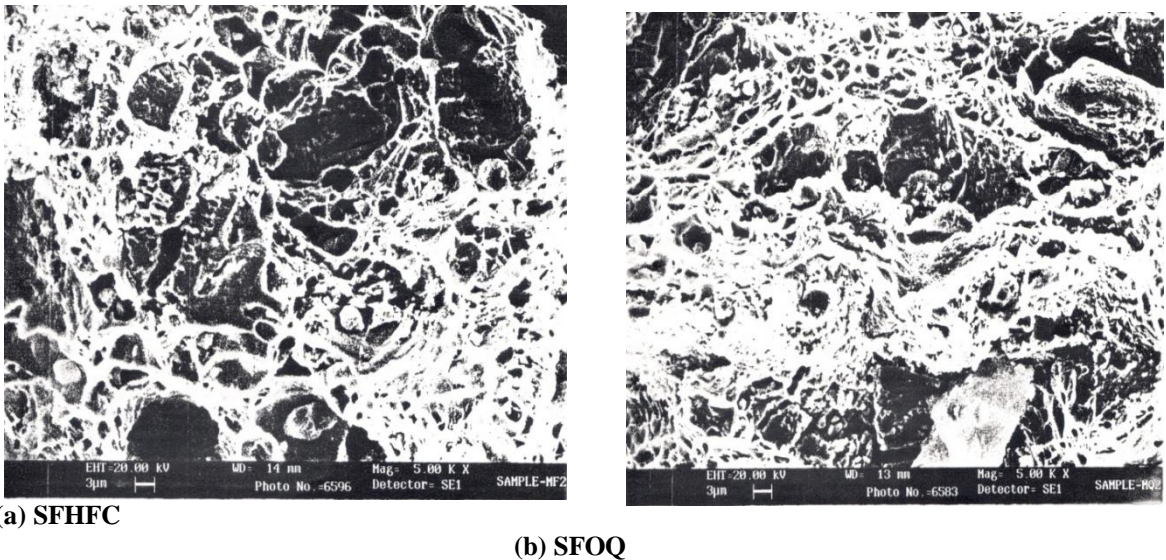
SEM Fractographs of Tensile Tested Specimen fractured Surfaces of Fe-0.16%C-2.25%Cr-1.05%Mo P/M Steel Under Two conditions of Heat Treatments.
